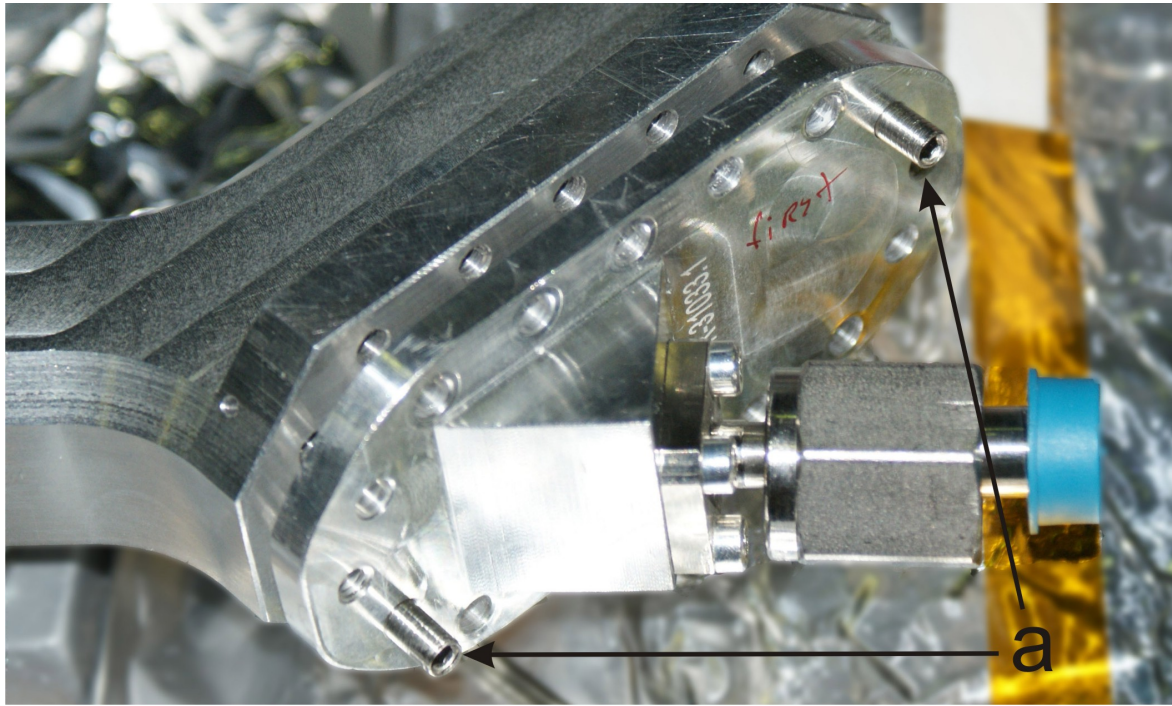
Mounting of a corner flange with a pre-installed VCR coupling. The guiding rods (a) provide parallel placing of the flange and the body.
